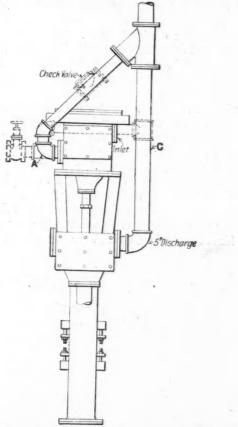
EXHAUST PIPING FOR SHAFT PUMP
